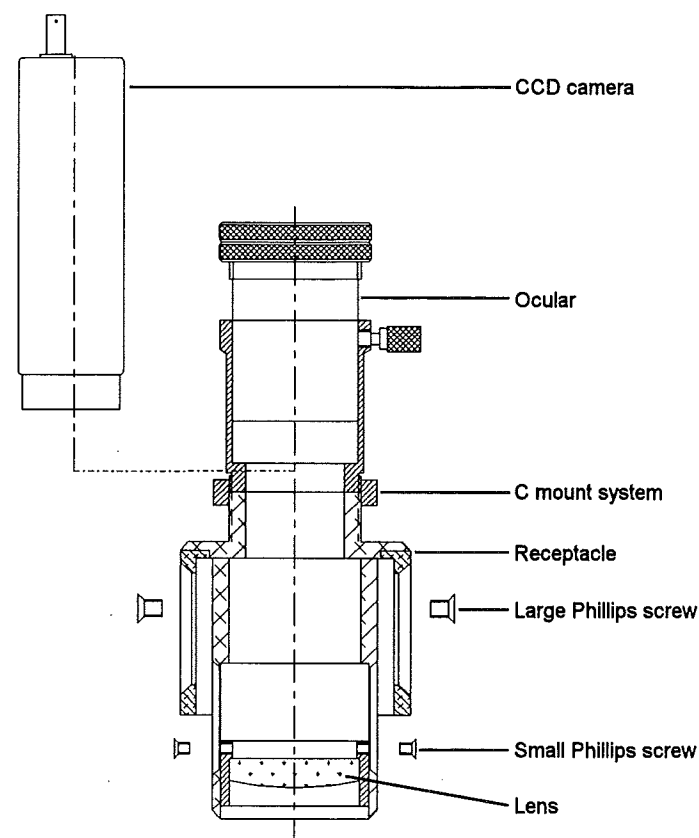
Camera/ocular receptacle assembly (shown with ocular installed)
